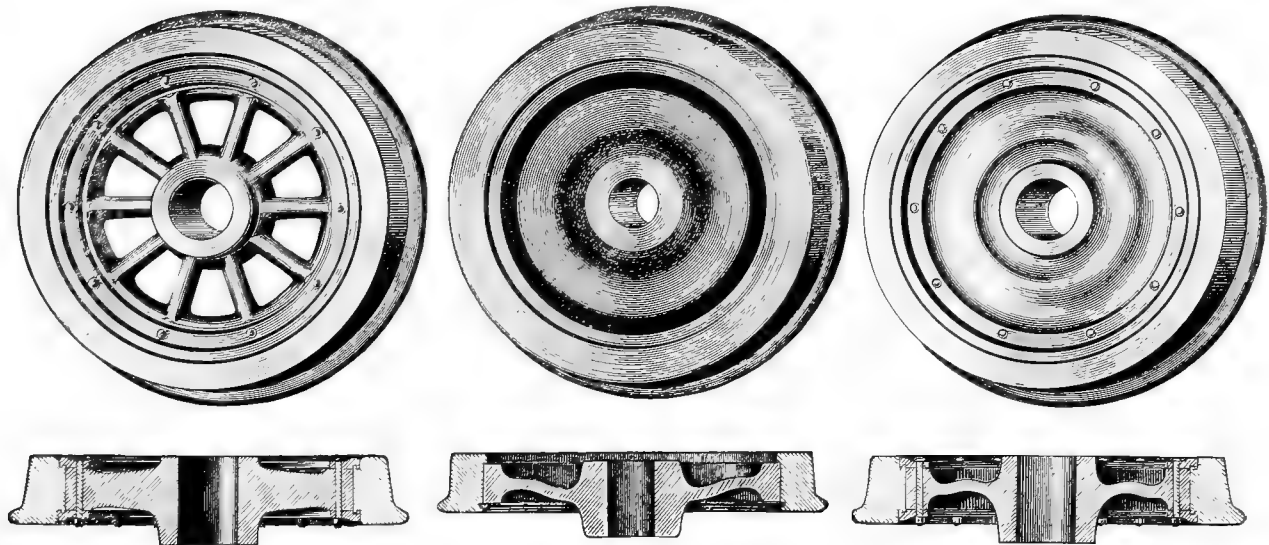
No. 3 Krupp Wheel. Cast Iron Spoke Center with Tire Secured by Wrought Iron Retaining Rings.
